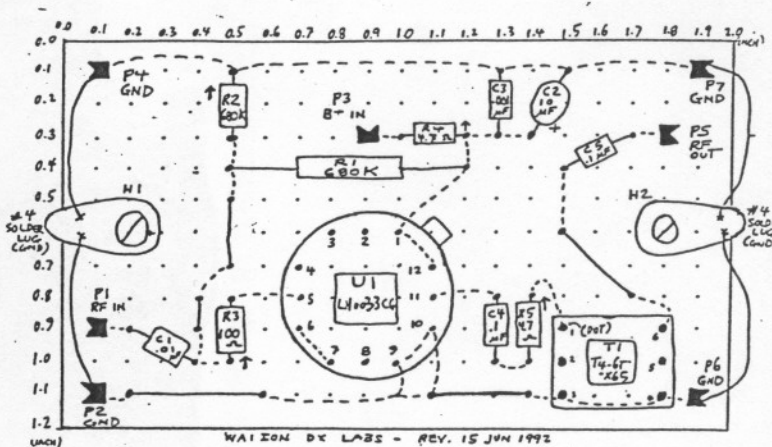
BUF-A BUFFER AMP. CARD (ASSEMBLY)
